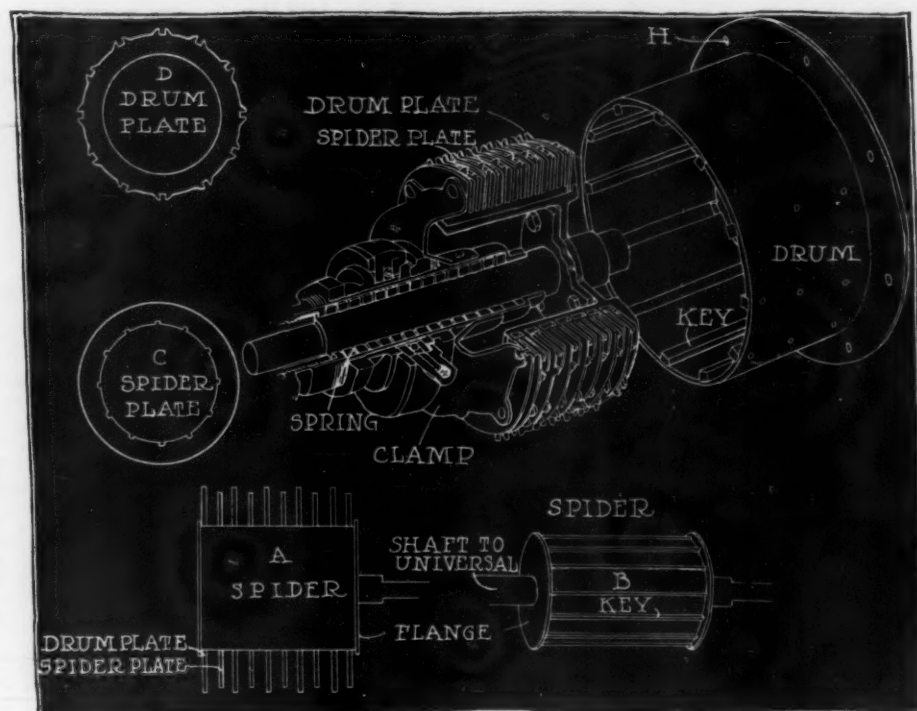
PARTS OF MULTIPLE-DISK CLUTCH AND ASSEMBLED CLUTCH
